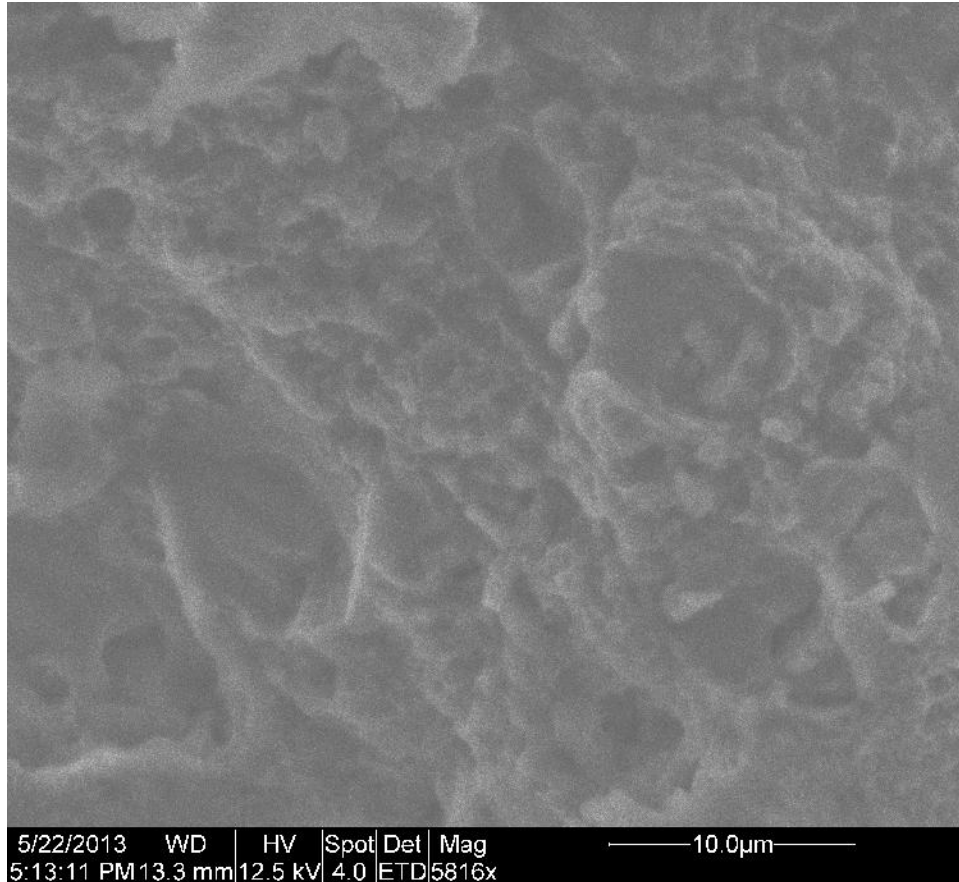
Scanning electron micrograph of the fracture surface of one of the Al 7050 – T7451 plate specimens. The dimples seen suggest microvoid coalescence, a common ductile fracture mechanism.
